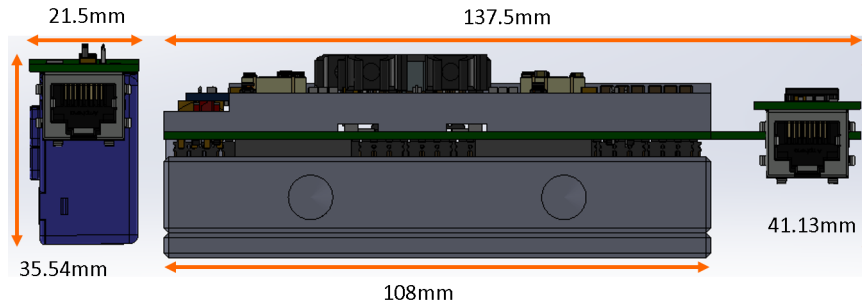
Inverter prototype dimensions. The power board features 338mm depth and the current measurement PCB features 166mm depth.
